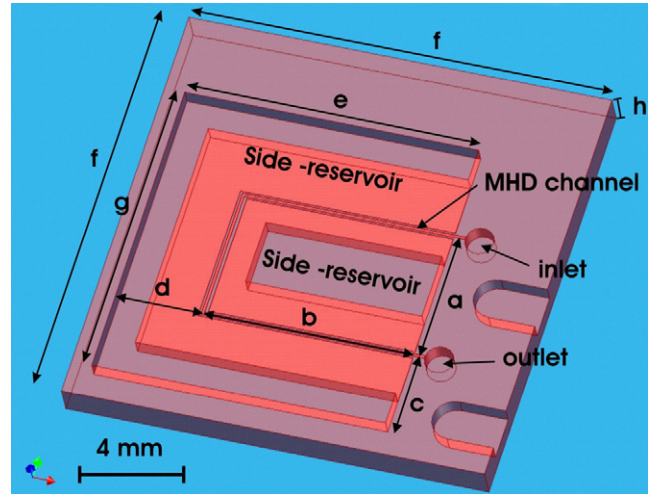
Three dimensional drawing of the MHD pump (drawing courtesy of F. Lucklum). The dimensions of the chip and side reservoirs were: $a=4$ mm, $b=6$ mm, $c=2.45$ mm, $d=2.4$ mm, $e=8.4$ mm, $f=12.65$ mm, $g=8.95$ mm, $h=1$ mm. We measured the dimensions on a processed chip, with a precision of ± 0.05 mm.
